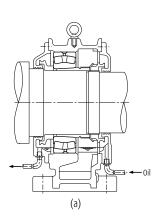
shows an example of ordinary jet lubrication. The lubricating oil is sprayed on the inner ring and cage guide face. In the case of high speed operation, the air surrounding the bearing rotates with it causing the oil jet to be deflected. The jetting speed of the oil from the nozzle should be more than 20% of the circumferential speed of the inner ring outer surface (which is also the guide face for the cage).
